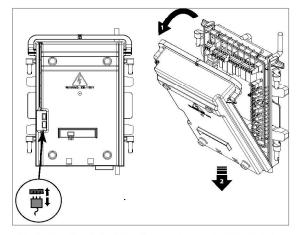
Prestige Solo & Excellence - Removal of Control Box Front Cover
